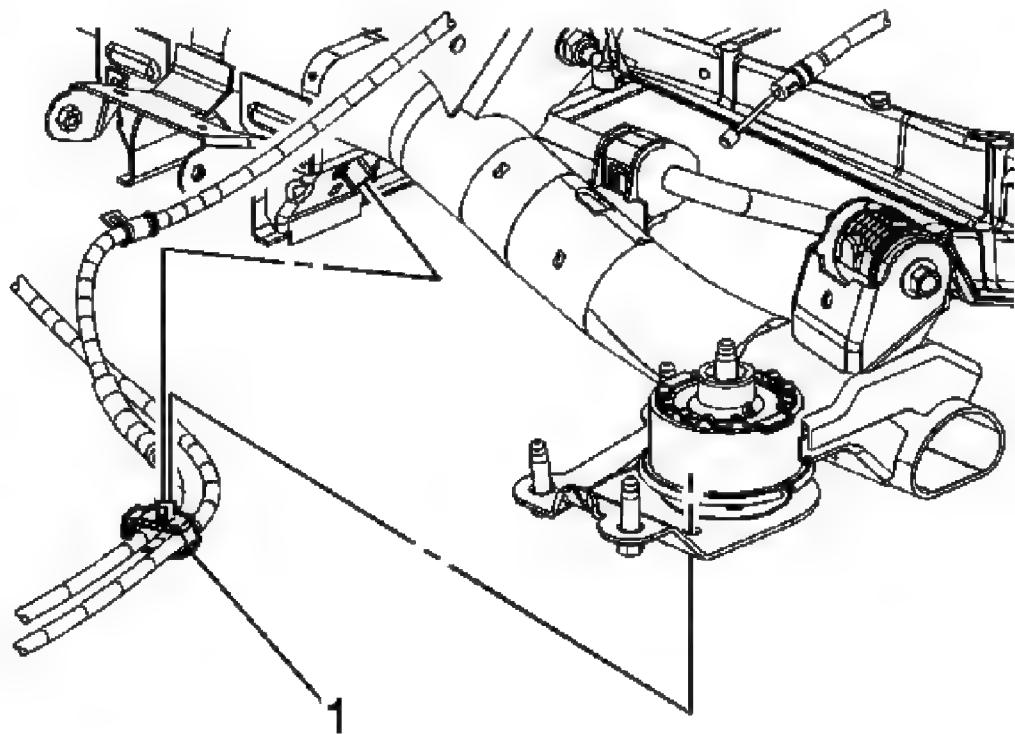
Identifying Left Rear Brake Cable In The Retainer
